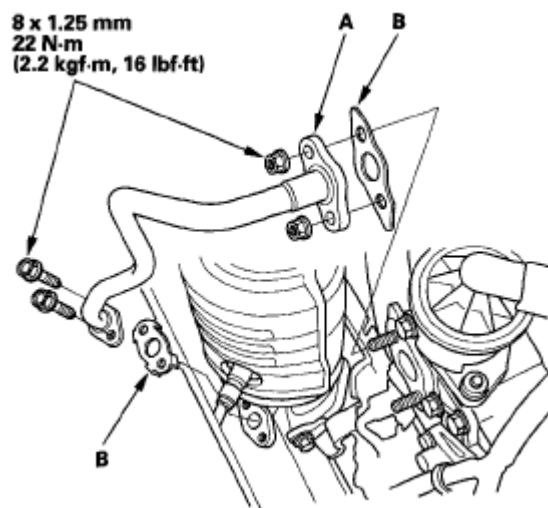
Identifying EGR Pipe And Gaskets With Tightening Torque
